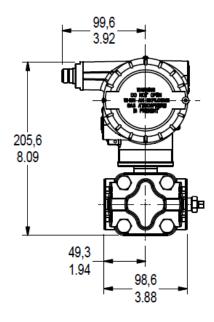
Dual Head Gauge, typical mounting dimensions for STGW840, STGW870 (remote adaptor shown)
